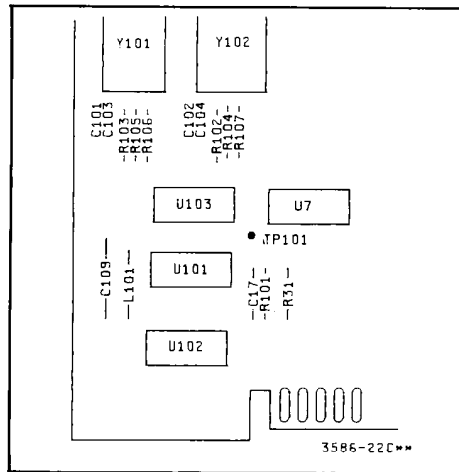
A22 (Revision A) Oscillator Component Locations.
